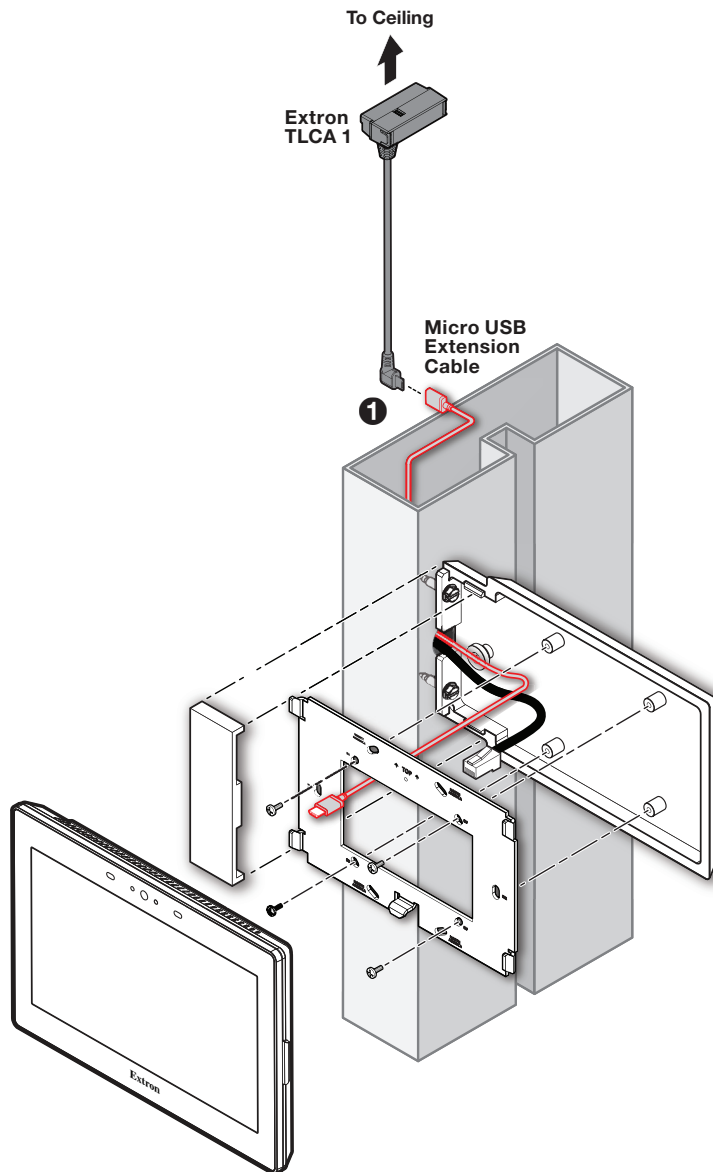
Mounting TLCA 1 to wall, glass wall or mullion mount (with micro USB extension cable)
